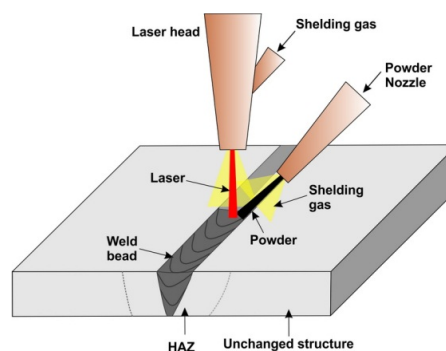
Schematic diagram for Laser Welding Process [23]
